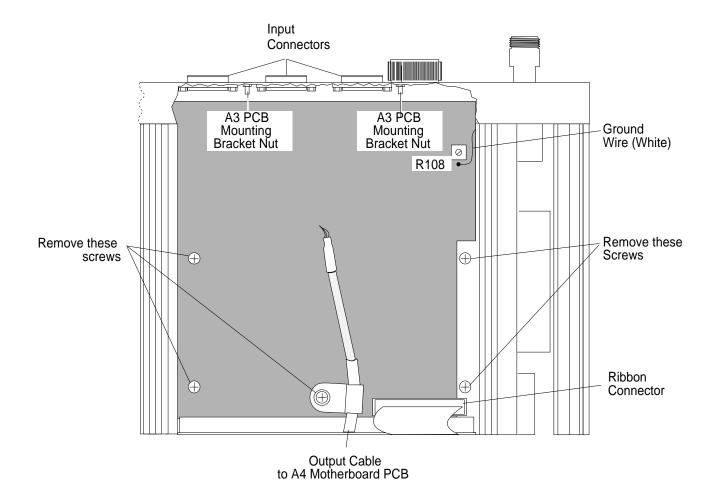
Removing the A3 Signal Channel PCB and Front Panel Input Connectors
